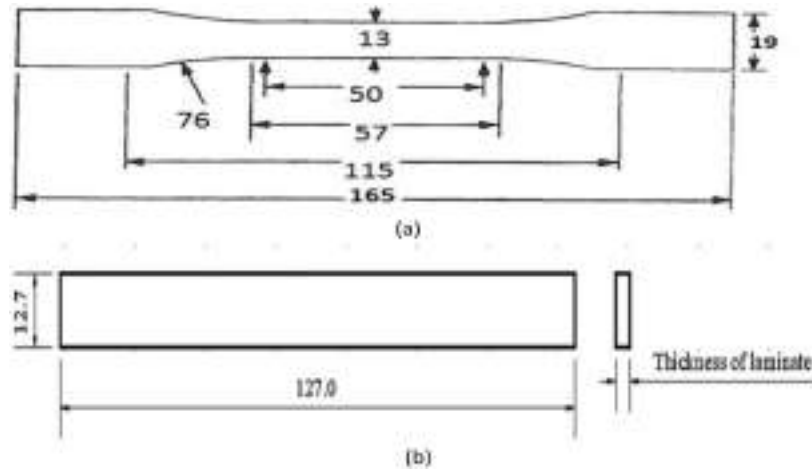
(a) ASTM D638 Type I Standard tensile specimen. (b) ASTM D790 Method B standard bending specimen.
